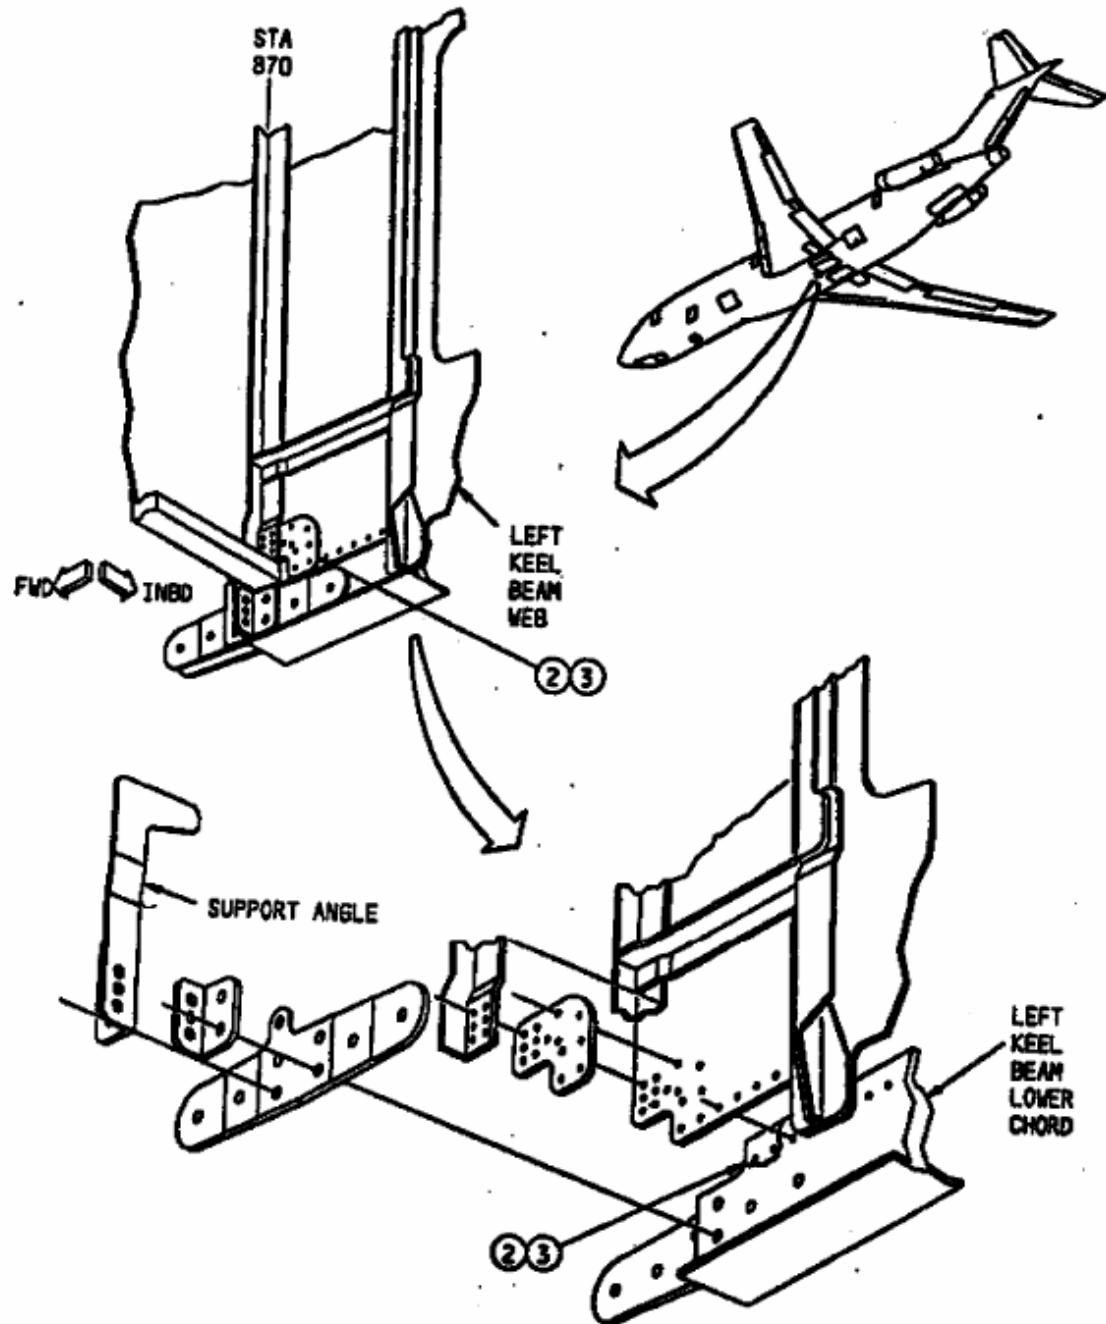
Schematic of keel beam inspection location. DVI was performed on the vertical flanges and support angles for cracking.
